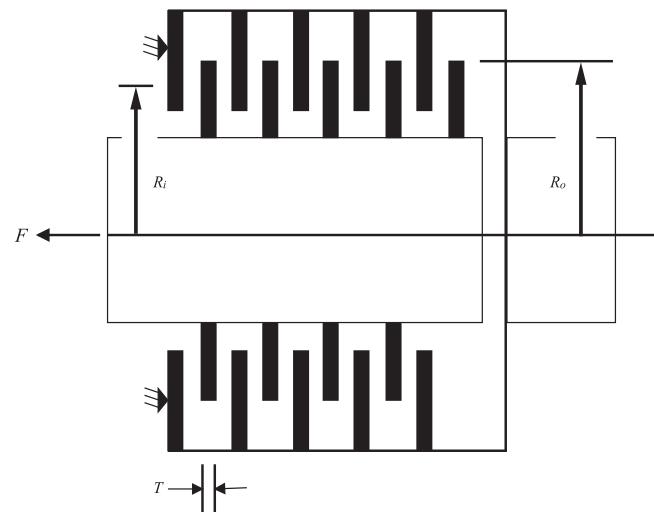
Schematic view of multiple-disk clutch brake design problem.
